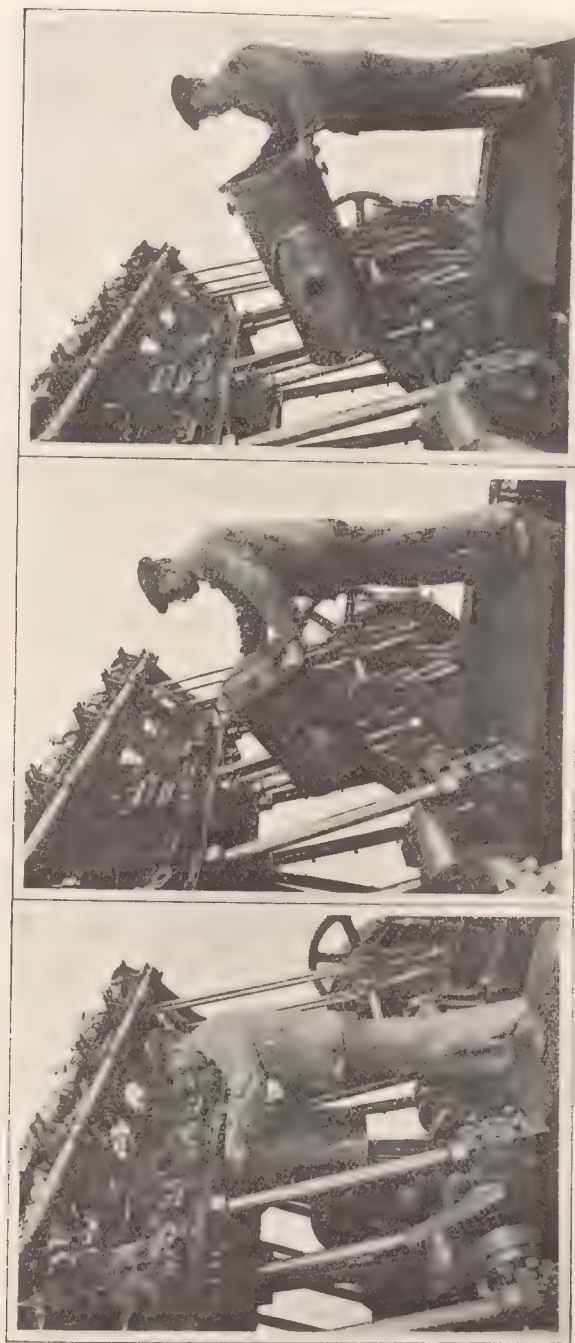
Dismounting a Piston in a Gunboat Engine.
